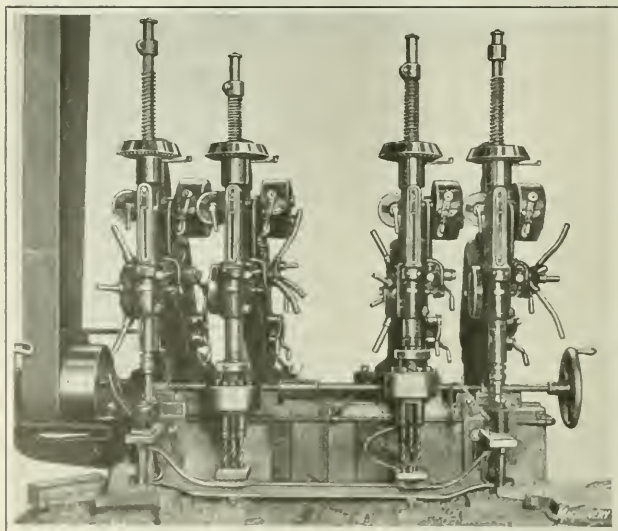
Four-spindle Gang Drilling Machine used in the Manufacture of an Automobile Axle
